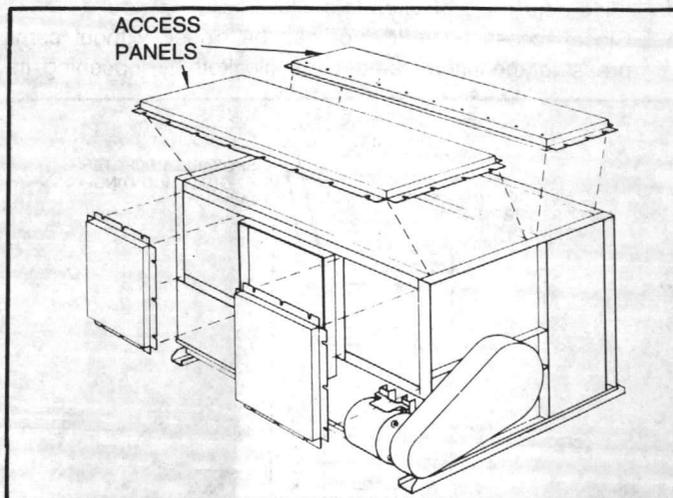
Typical Torrivent or Cabinet Fan Access Panel Arrangement on Sizes 35 and Larger
